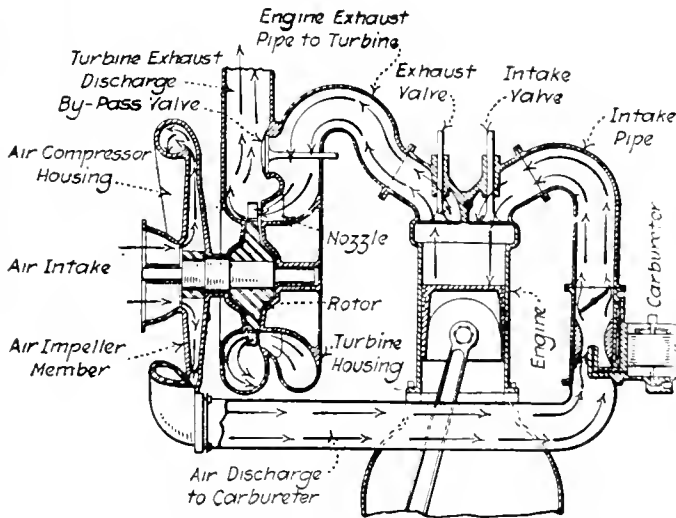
Centrifugal Type Blower Direct Connected to a Turbine Wheel That is Impelled by the Engine Exhaust Gases
